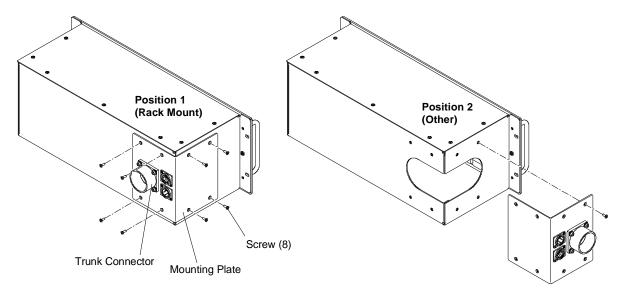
Repositioning FOH Breakout Module Trunk Connector
